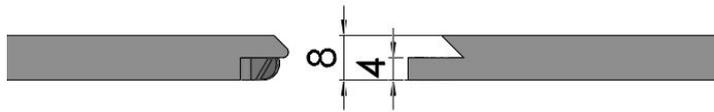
Dimension of 8mm dovetail flooring of side view
